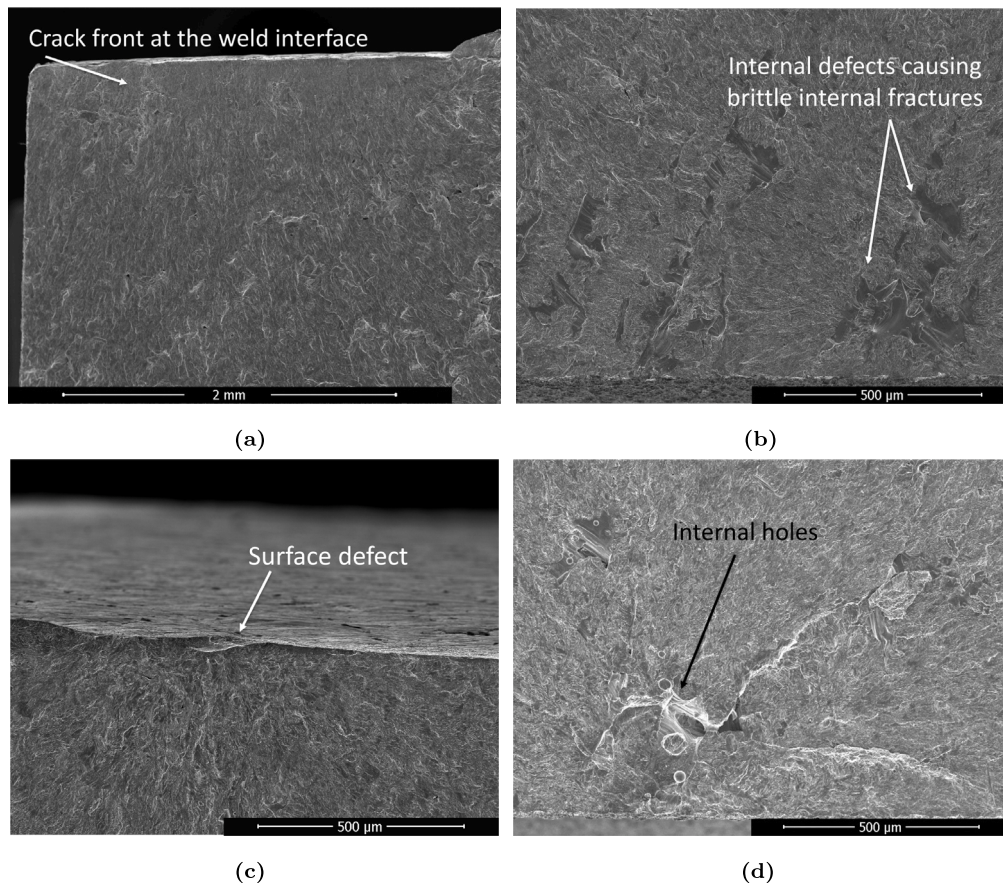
Fracture surfaces of the fatigue tests samples: (a) crack front located at the interface; (b) internal defects for the Vertical samples; (c) surface defects for the Horizontal samples; (d) crack formation from single defect.
